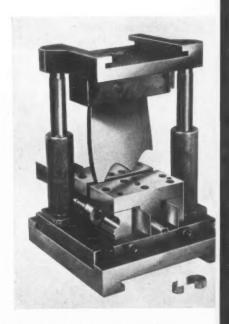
(Left) Simple Type of Cutter Blade Used on Flying Cut-off Machines
